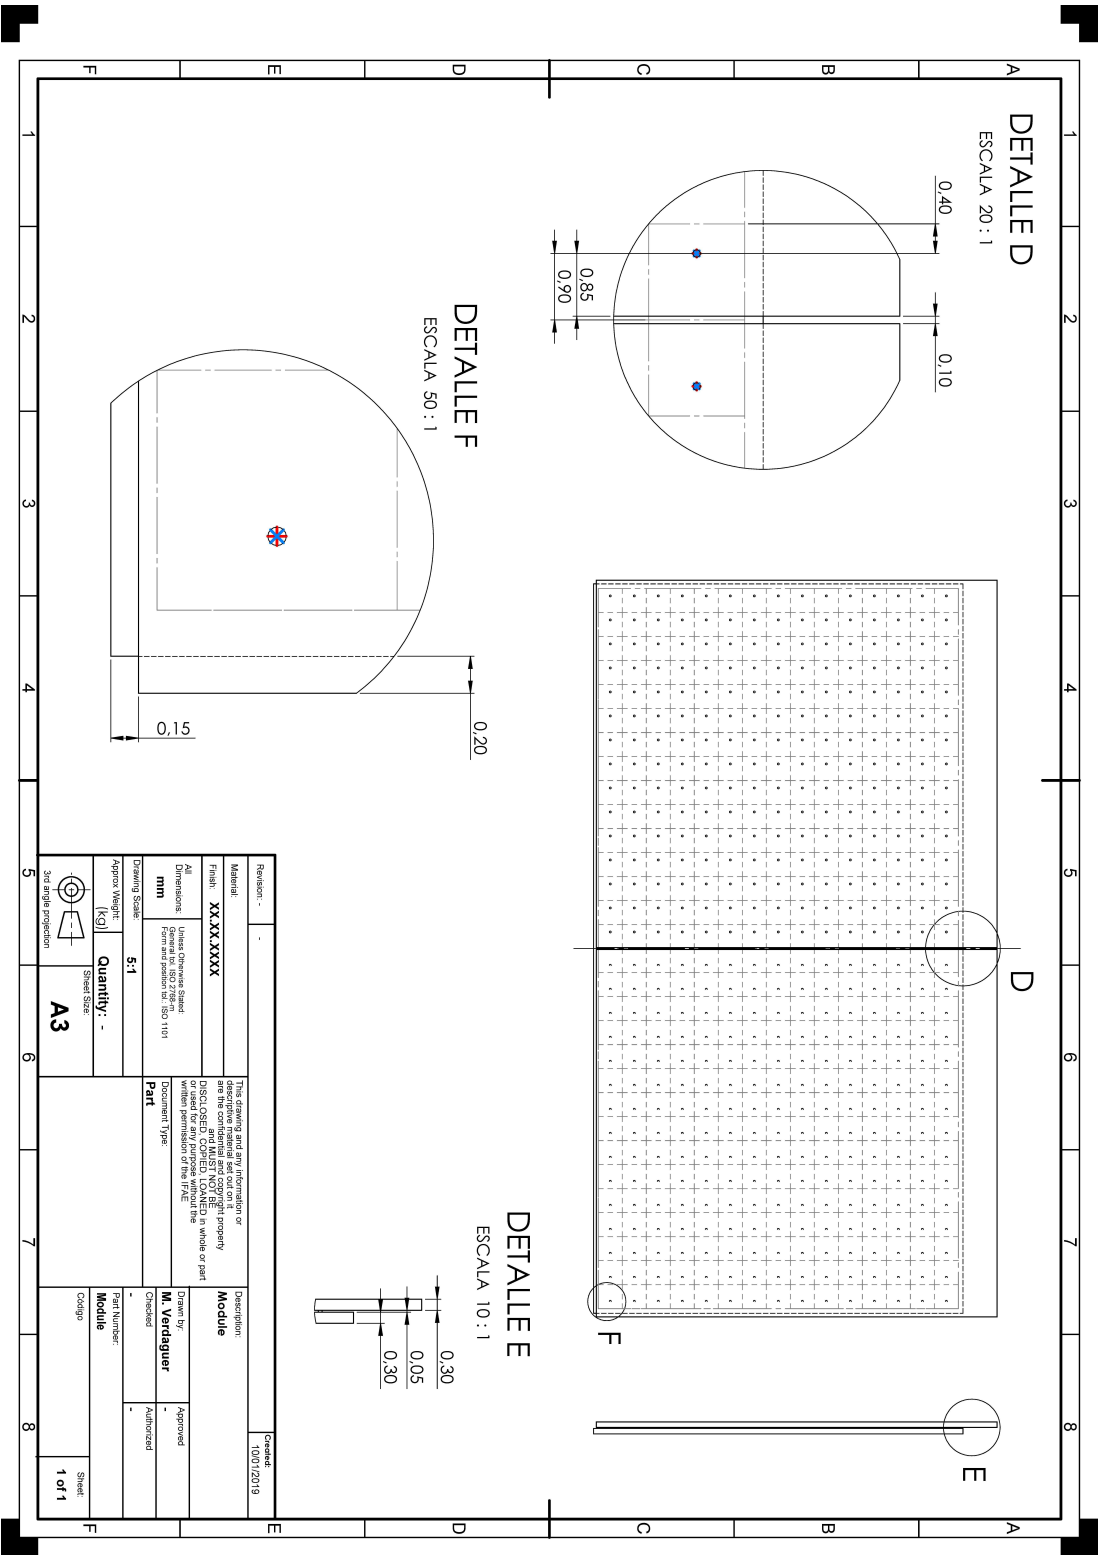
Sketch of the bare module (sensor and ASIC). Distances are in millimetres. The bump pads on the sensor are shifted by 250 μm on each side of the sensor, to allow a 100 μm separation between the ASICs.
